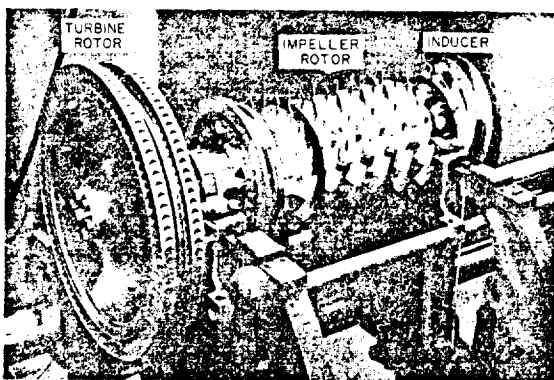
Inducer, impeller rotor, and turbine rotor assembly of a typical multi-stage axial-flow pump.
